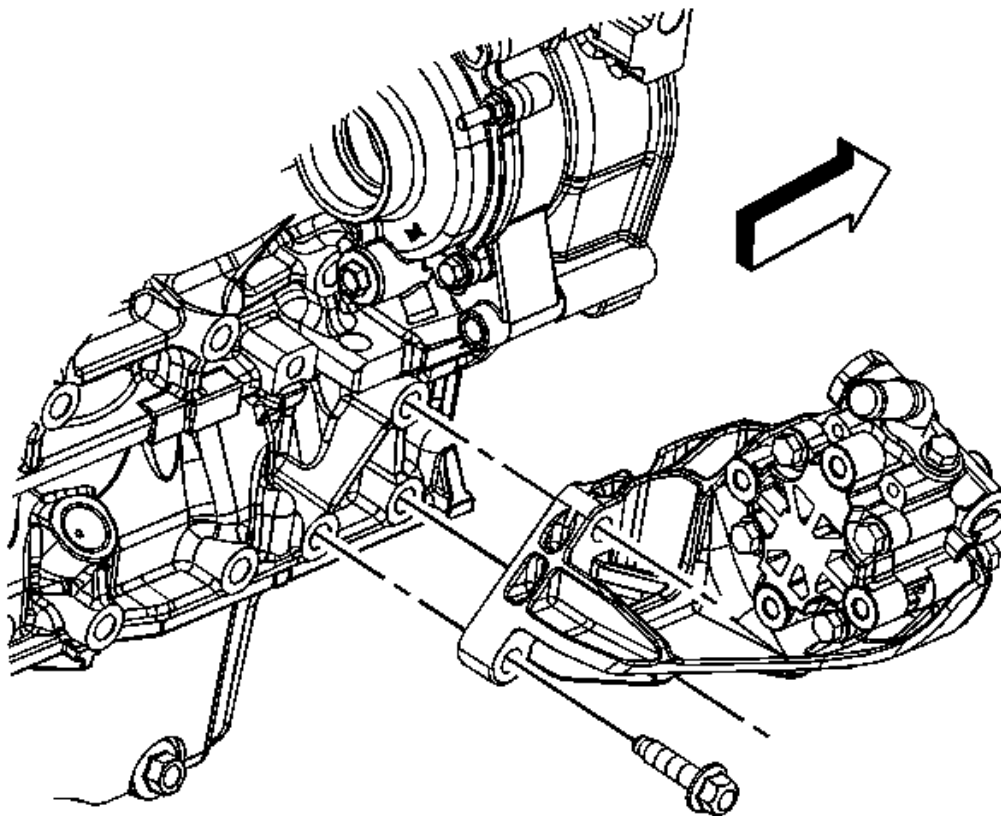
View Of Power Steering Pump, Bracket & Bolts
